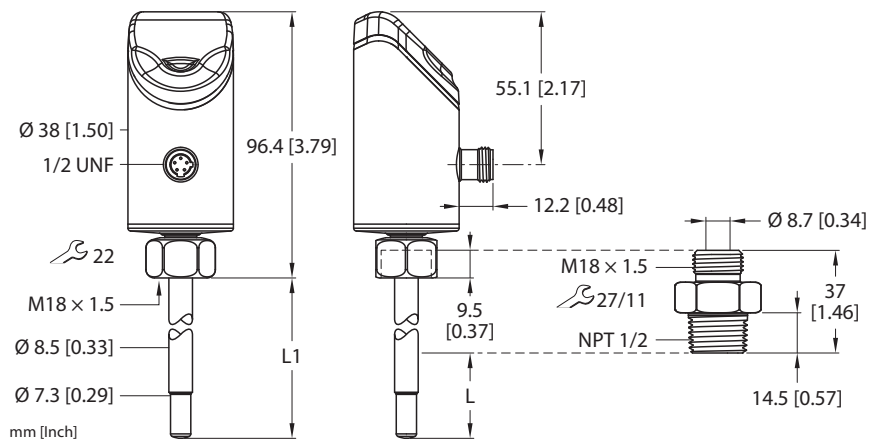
Dimensions — sensor with 1/2" UNF connector and 1/2" NPT screw-in adapter
